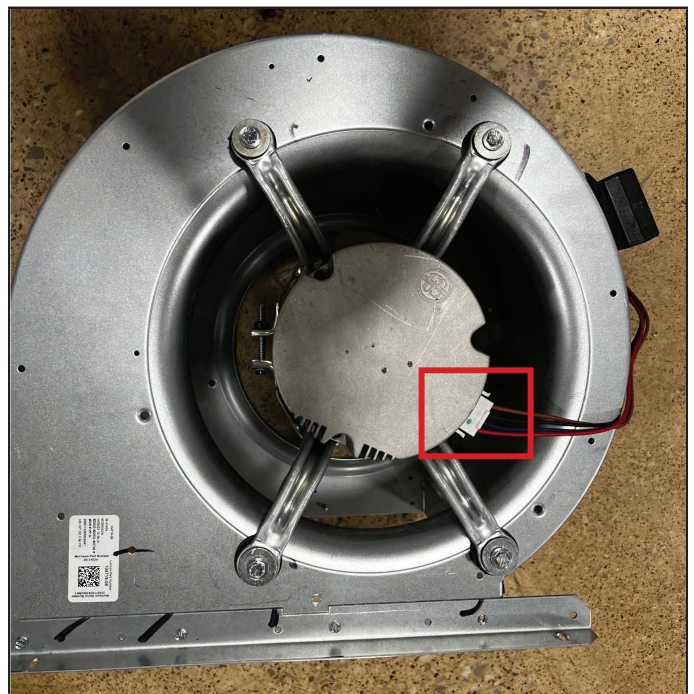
Motor Rotated to Position the Wiring Plug at 5 O'Clock
